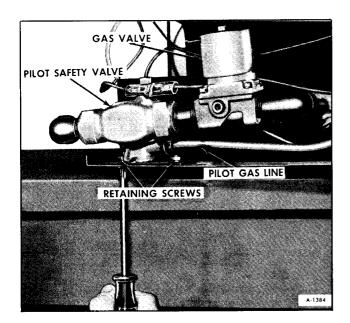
(NT-22G) Removing Pilot Safety Valve Retaining Screws
